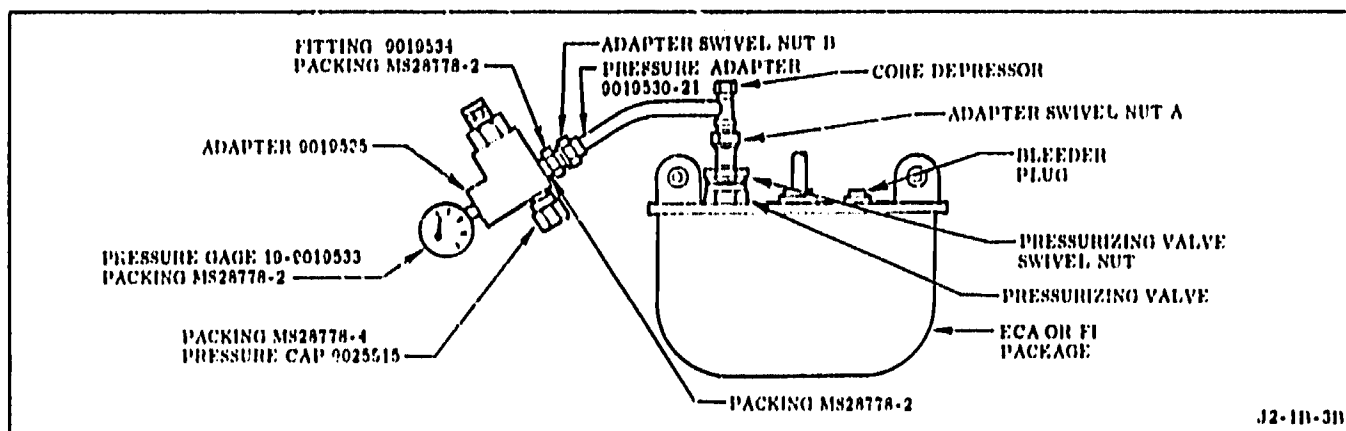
Measuring Pressure in Electrical Control Assembly and Flight Instrumentation Packages
